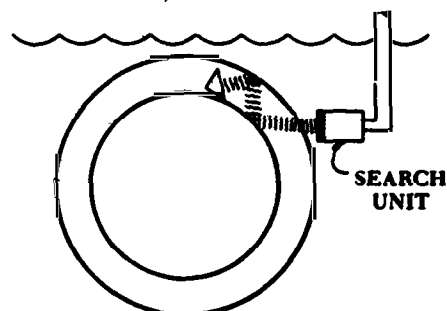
Immersed Angle-Beam Technique (Pipe or Tube)
